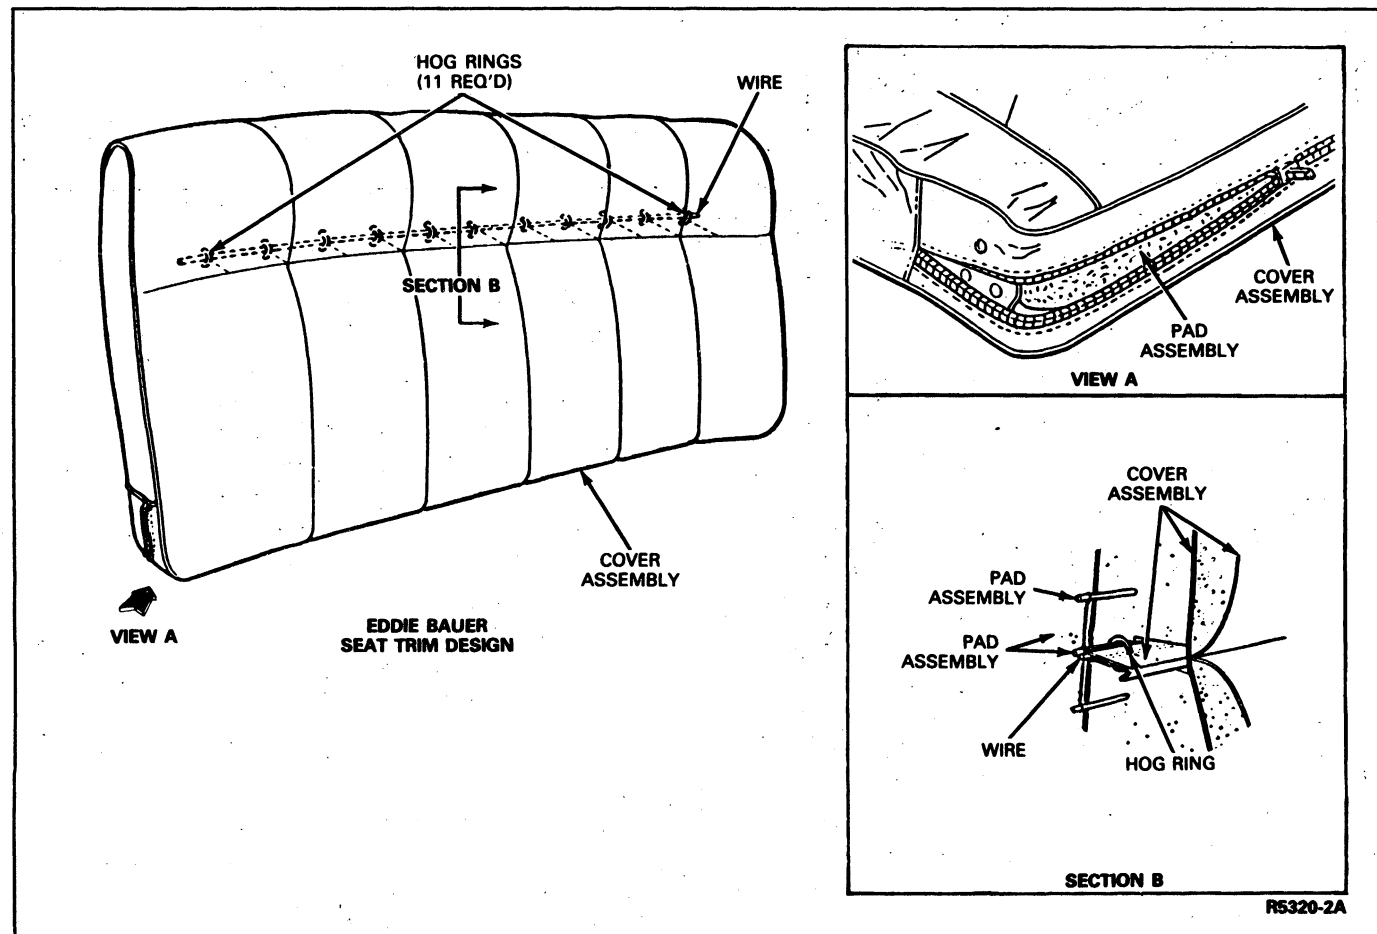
Rear Seat Back Cover Assembly—Bronco
